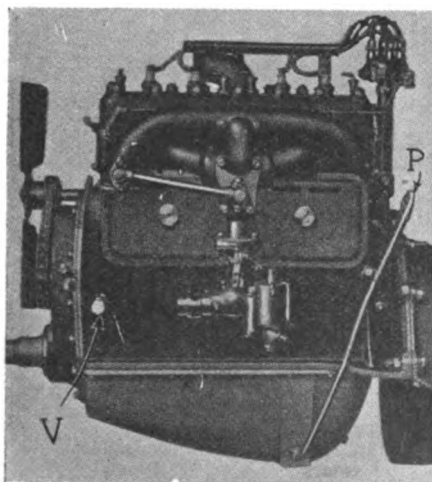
General view of the engine indicating the location of the oil pressure relief valve V, shown in section in Fig. 8A, and the oil pump P and delivery pipe
